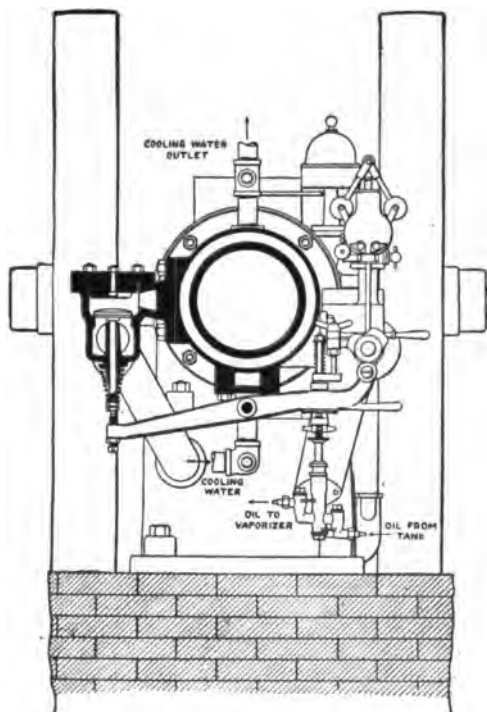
Transverse Section Hornsby-Akroyd Oil Engine.
